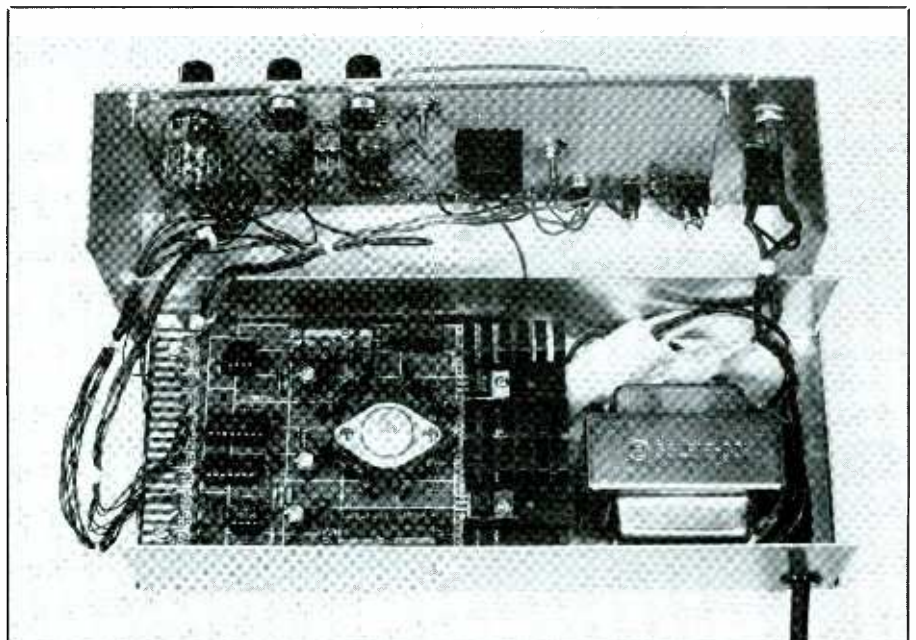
Most of Prototyping Kit circuitry wires on perforated board.
